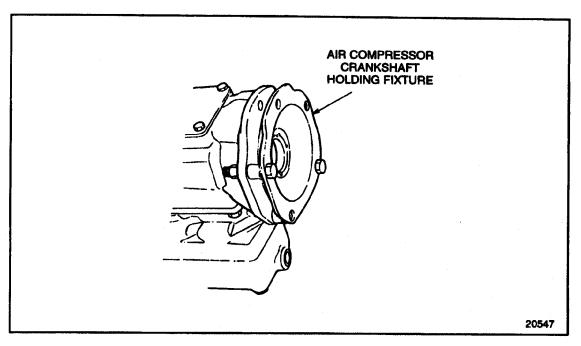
Air Compressor Crankshaft Holding Fixture Installation
